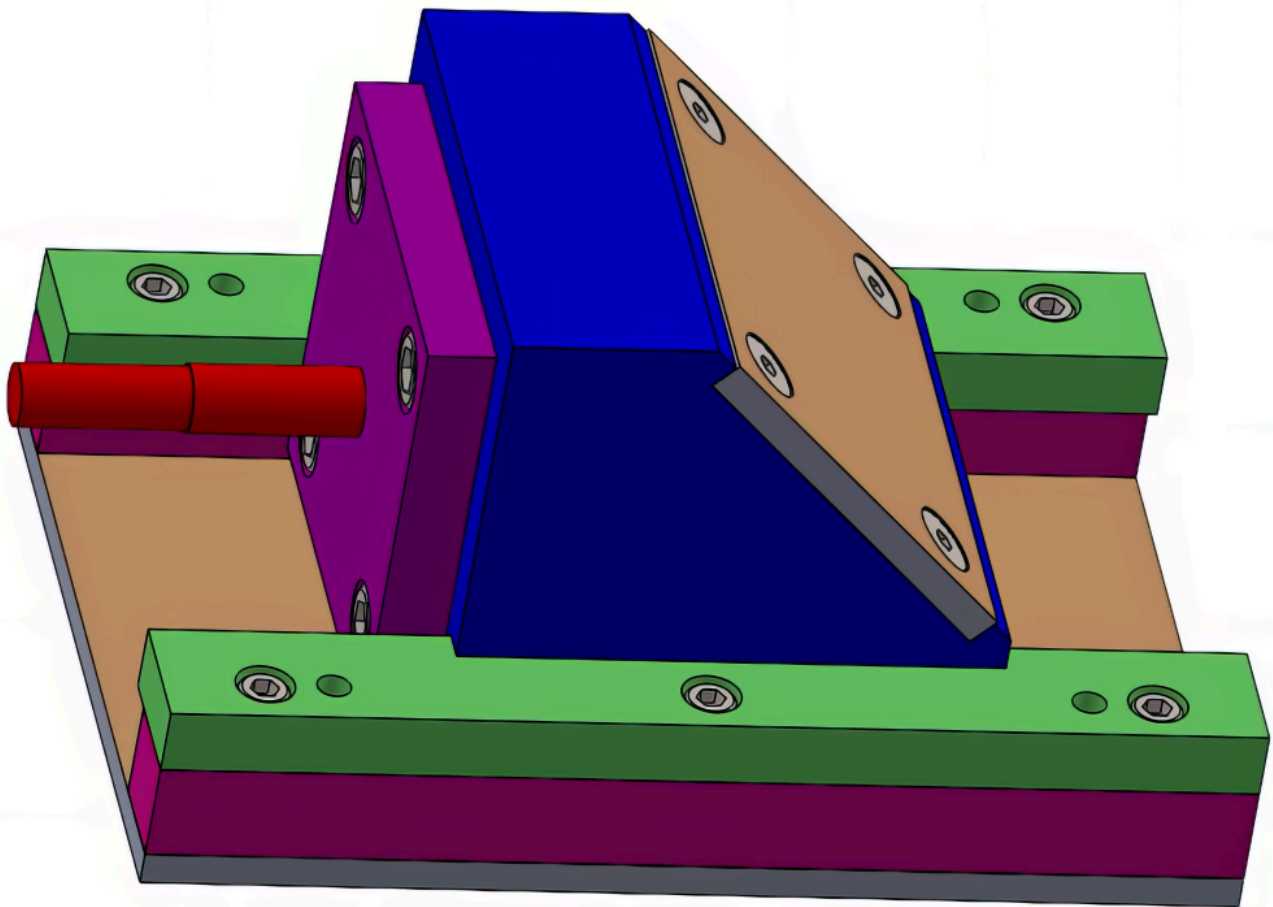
Subassembly drawing features a portion of a larger assembly.
